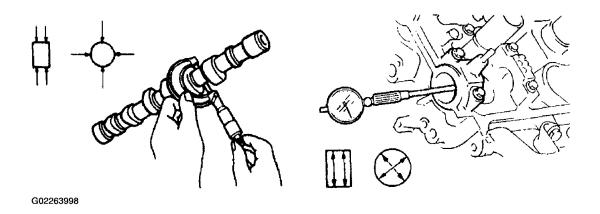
Measuring Journal (Housing) Bore & Outside Diameter Of Camshaft Journal Courtesy of SUZUKI OF AMERICA CORP.
